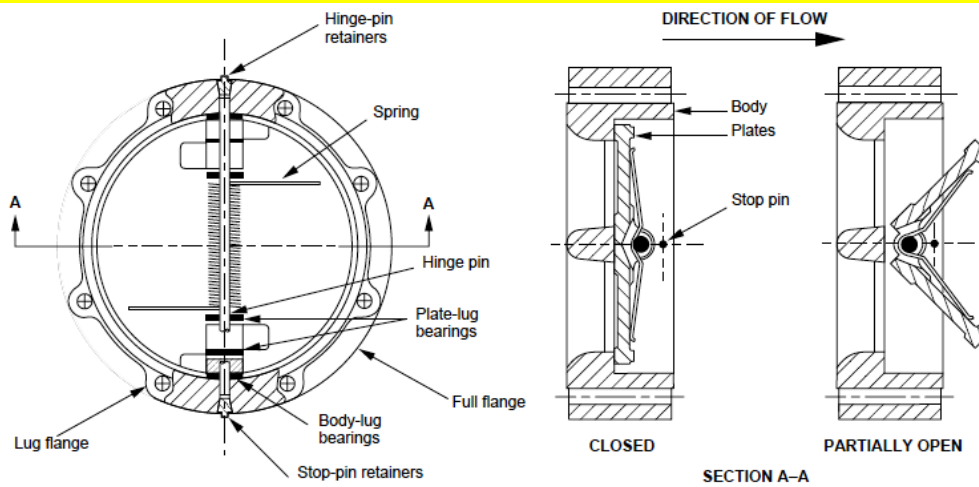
Typical Type 'A' Dual-plate Wafer Check Valve
